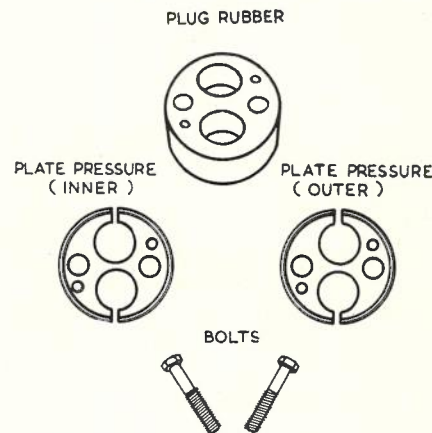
Rubber Plug and Pressure Plates of B.P.O. Type Joint.
